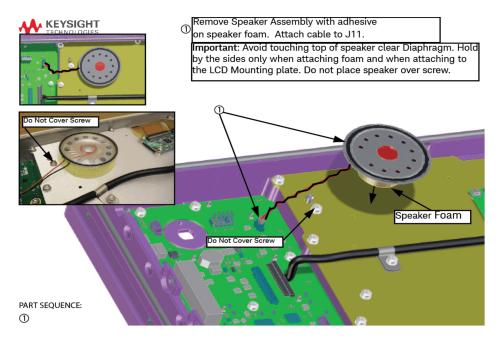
Remove Speaker Assembly and Mounting Foam
